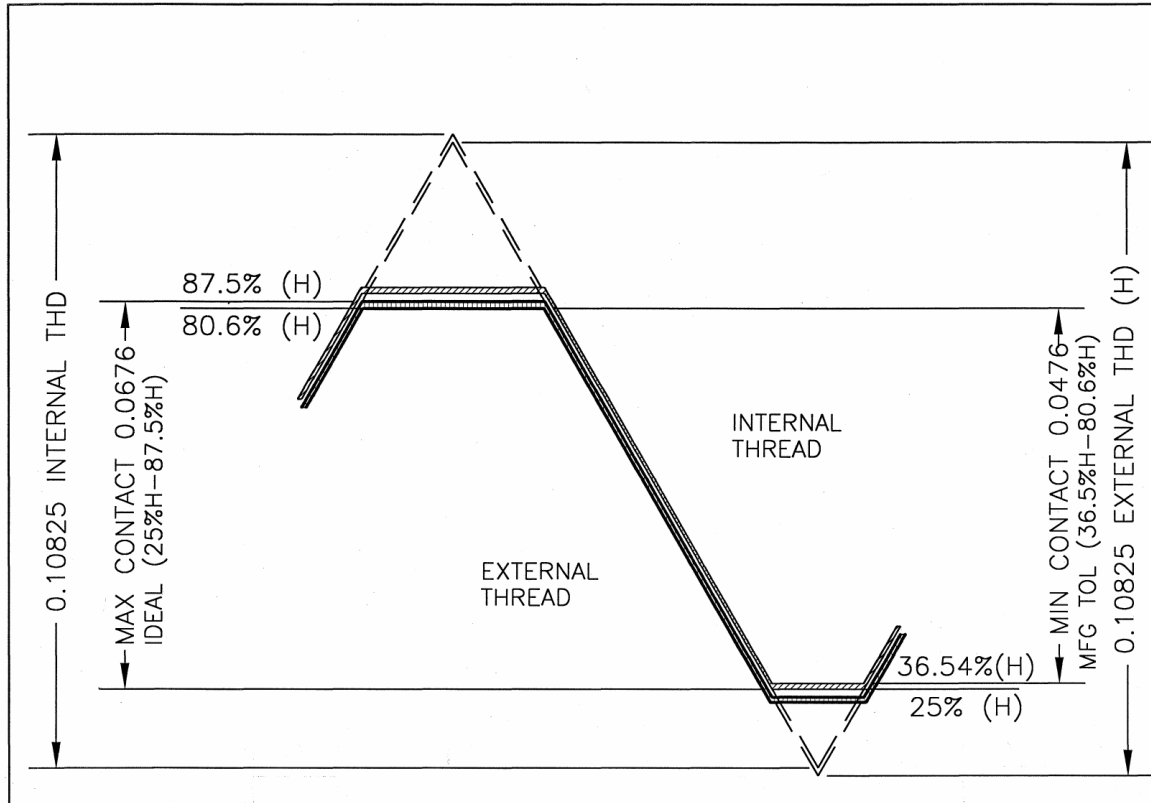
Thread Engagement (Ref paragraph D1 and D2)
